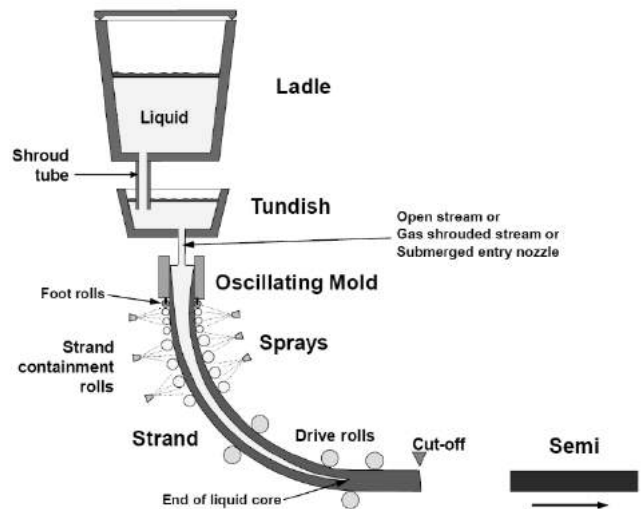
Side View of a Typical Continuous Casting Machine [2]
